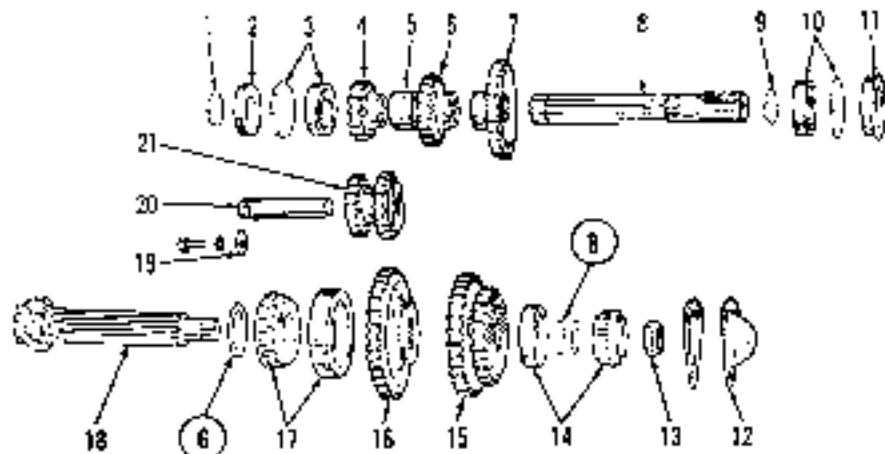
Pony transmission assembly. Shims (8) are for bevel pinion shaft bearing adjustment, Shims (9) are for mesh adjustment of main drive bevel gears.
